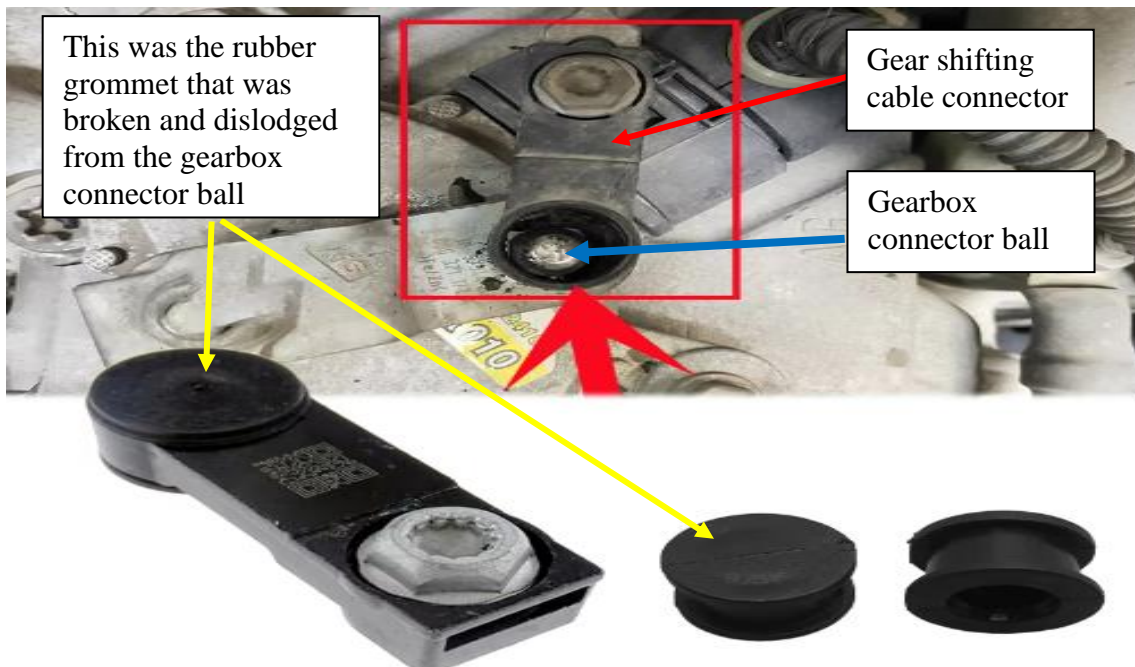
shows an illustration of a gear shifting cable connector (red arrow), the rubber grommet (yellow arrow) and the gearbox connector ball (blue arrow). The rubber grommet connects and secures the gear shifting cable connector to the gearbox connector ball of the gearbox.
